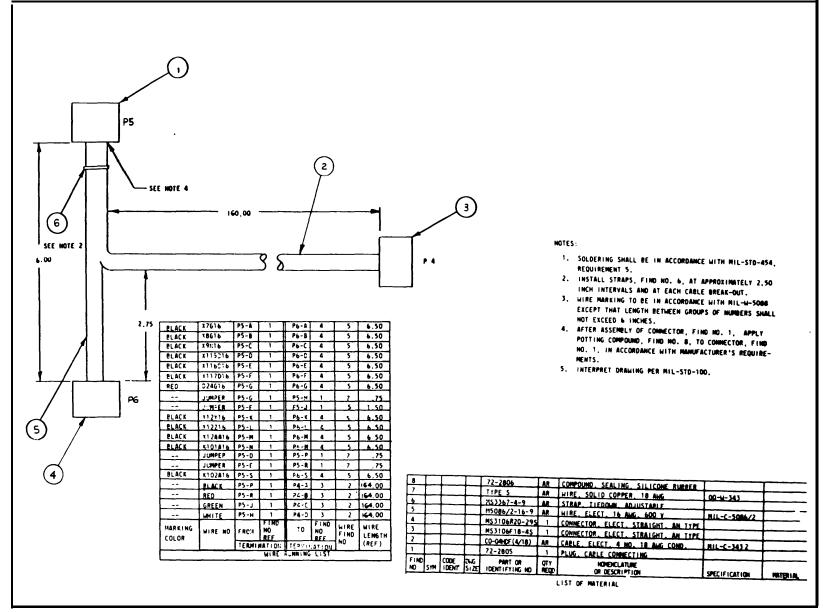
Load Bank Signal Wiring Harness, Drawing No. 72-2830
